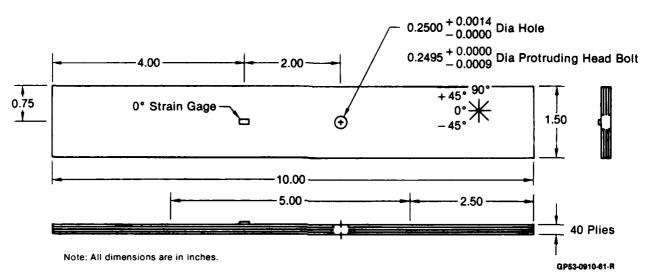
Unloaded Hole Tension and Compression Static Test Specimen
